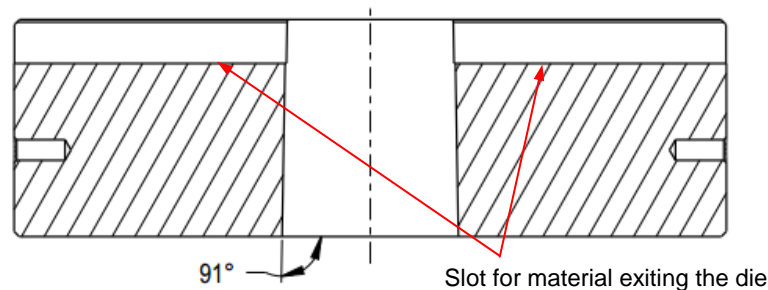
Sectioned view of pre-stressing ring is shown with a tapered hole in the centre.
